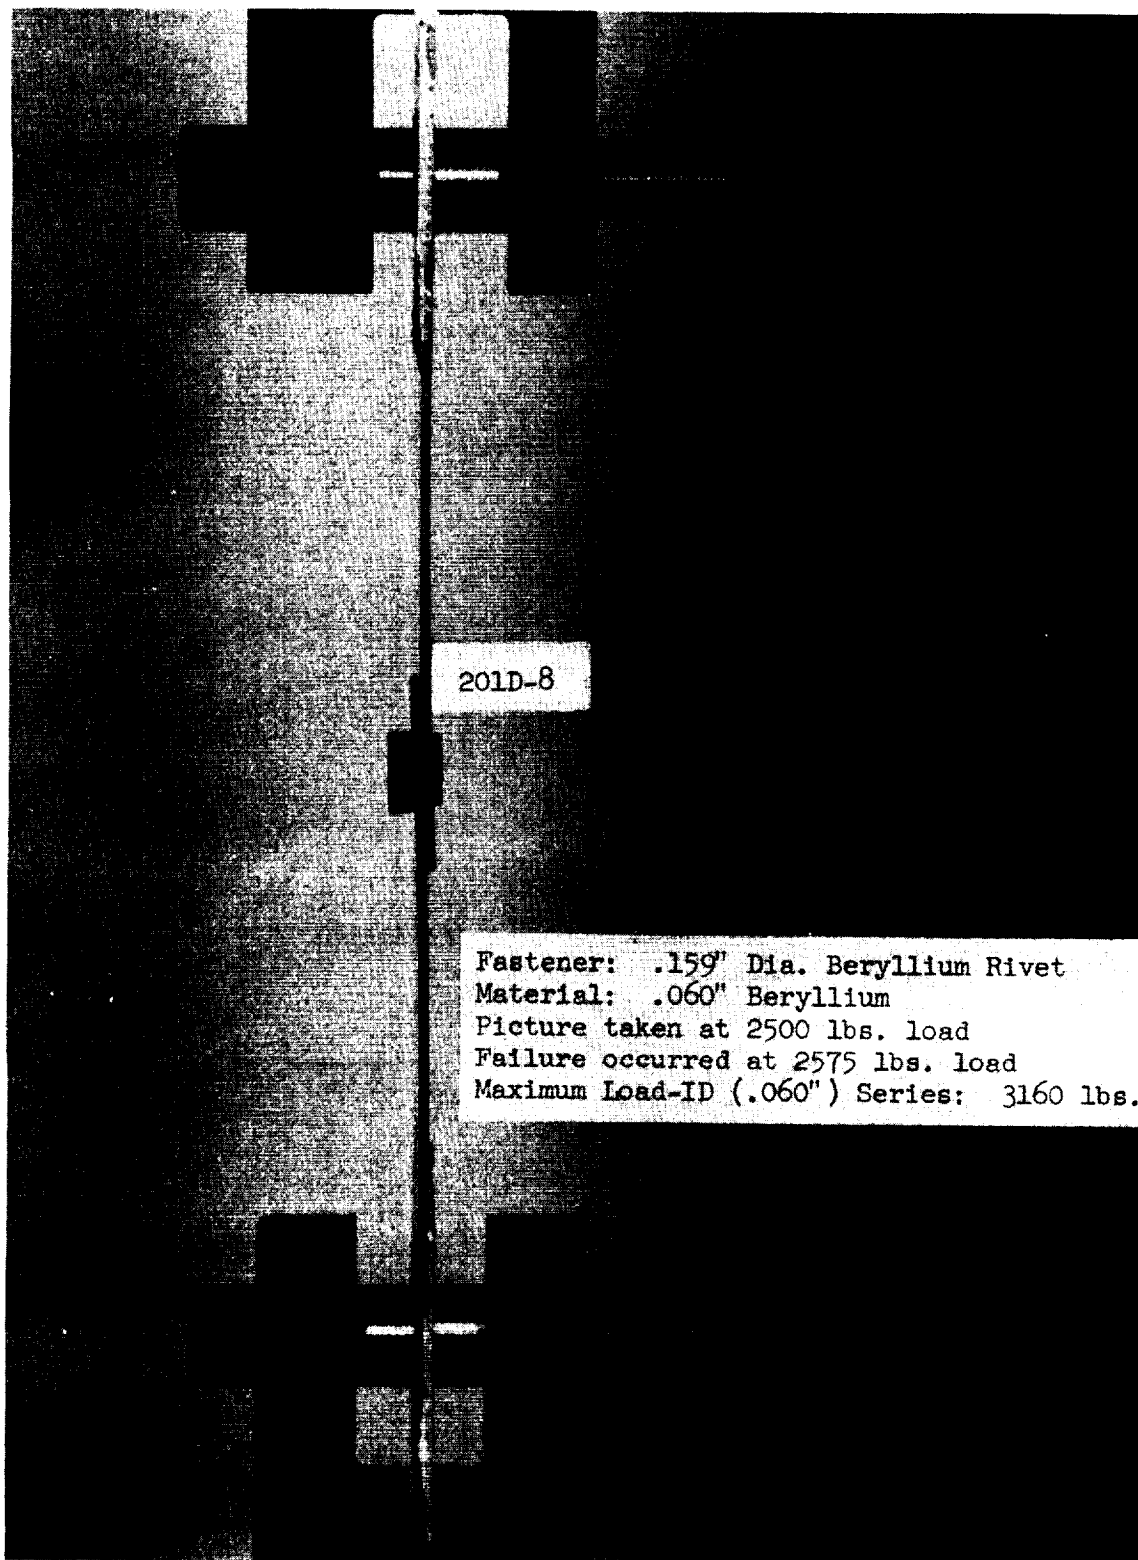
TYPE ID SPECIMEN - 0.060-INCH MATERIAL - TENSILE TEST
